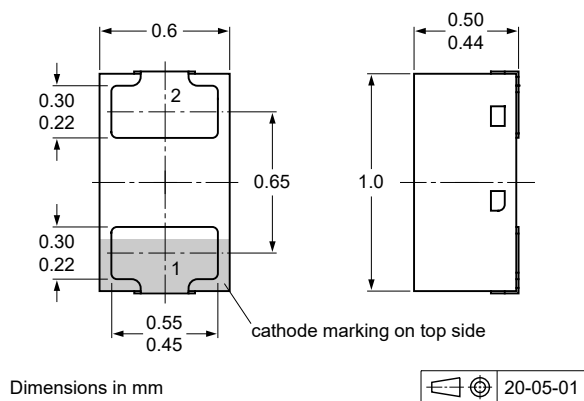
Package outline DFN1006BD-2 (SOD882BD)
